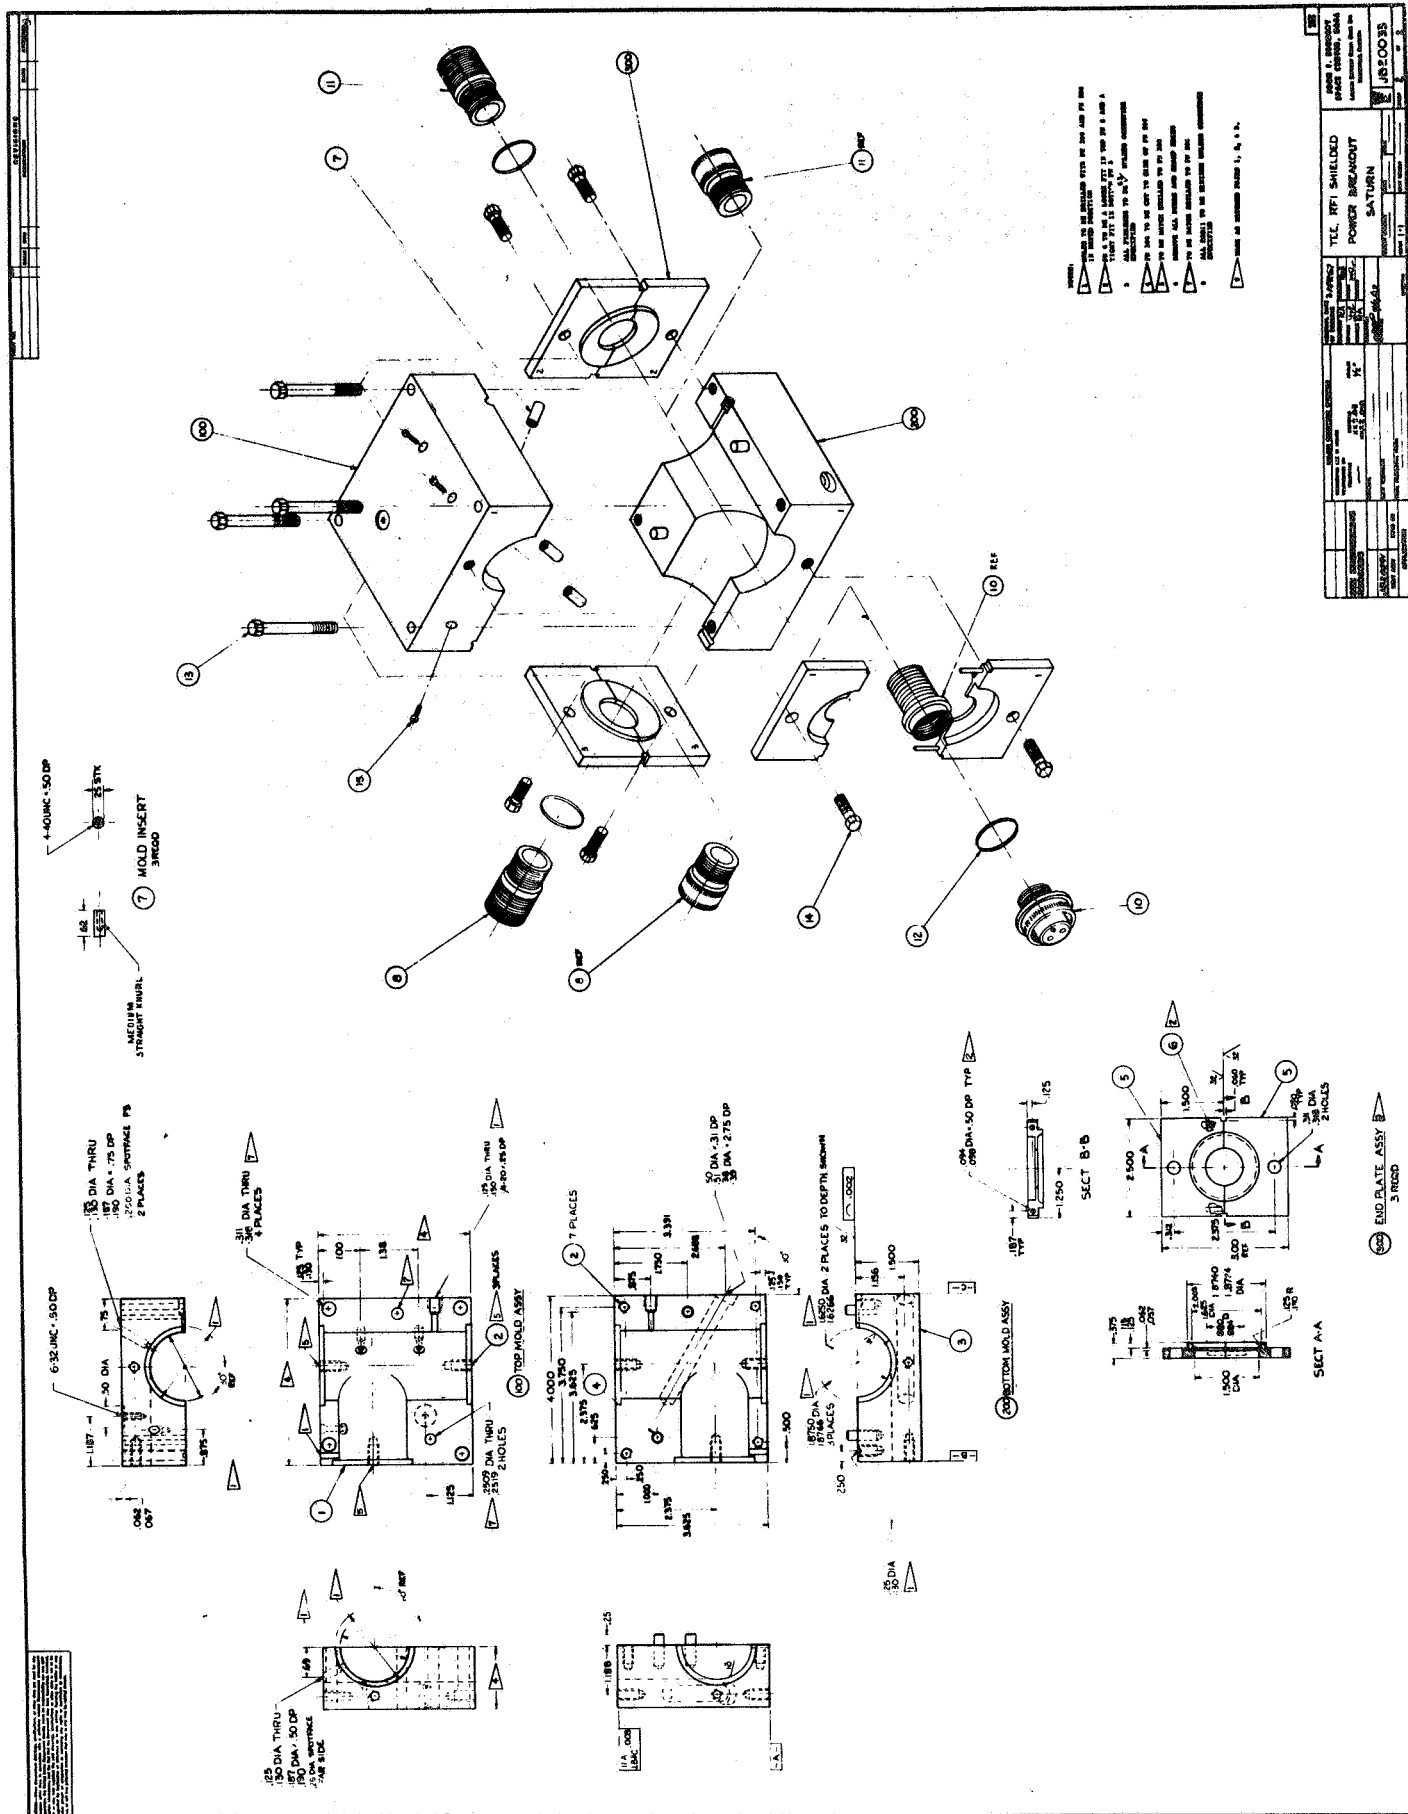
Molded Tee Adapter (Sheet 2 of 2)
